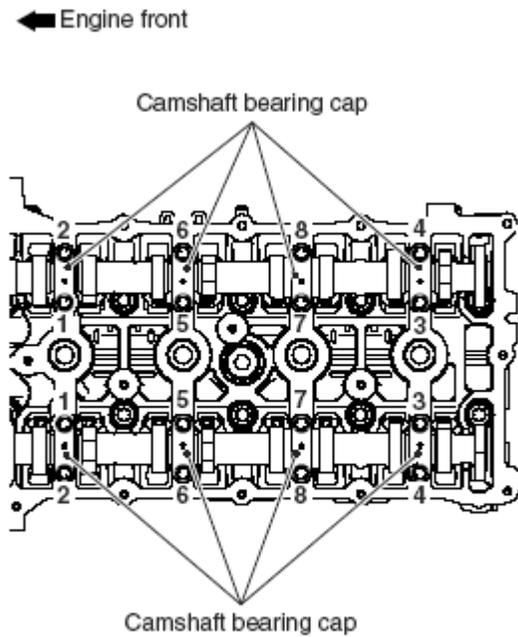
Identifying Front Camshaft Bearing Cap Assembly
